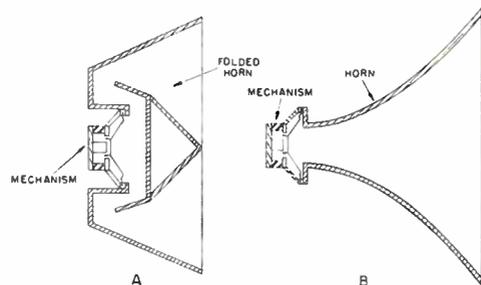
Large-throat horns for horn loudspeakers. A) Folded horn. B) Straight-axis horn.
